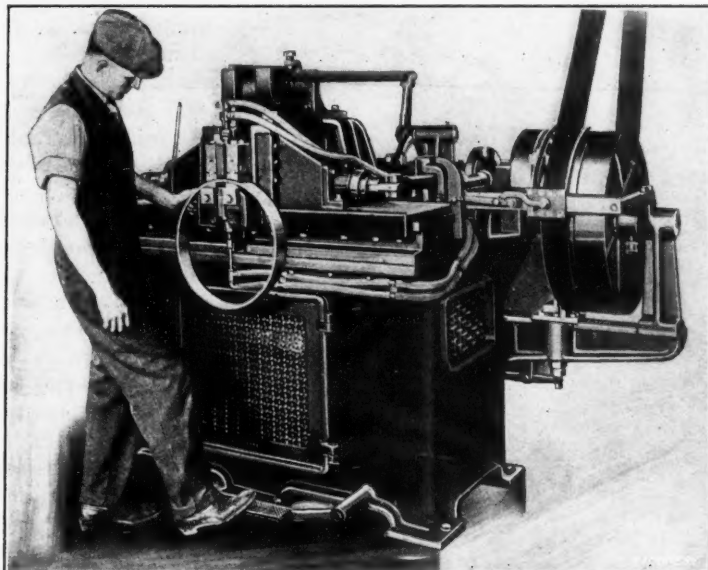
Power-driven "Toledo" Automatic Butt-welding Machine especially designed for welding Hoops, having a Maximum Capacity of 2 by $\frac{3}{4}$ Inch and a Minimum Capacity of 1 by $\frac{1}{4}$ Inch Flat Stock
